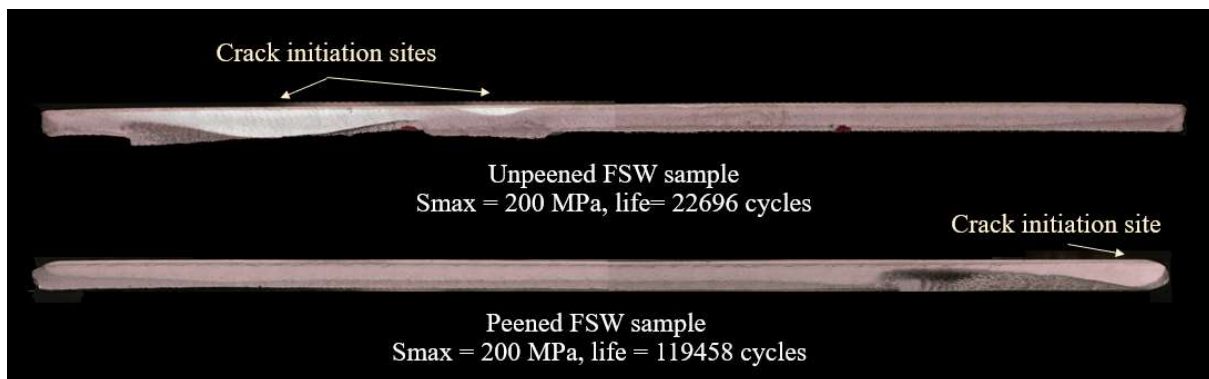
Fractured surfaces of unpeened and peened samples with a lack of penetration defect, after fatigue testing.
